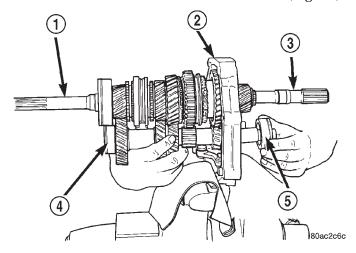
Remove Countershaft and Countershaft Rear Bearing
